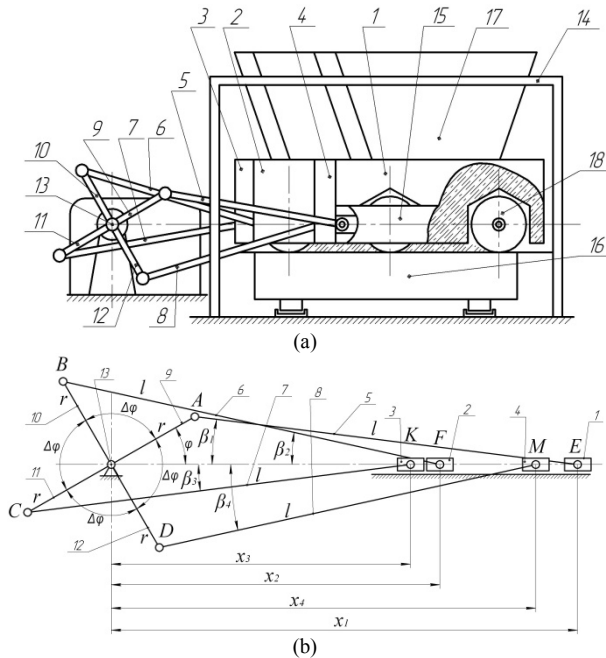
Roller forming unit with balanced drive (a) and its kinematic scheme (b)
